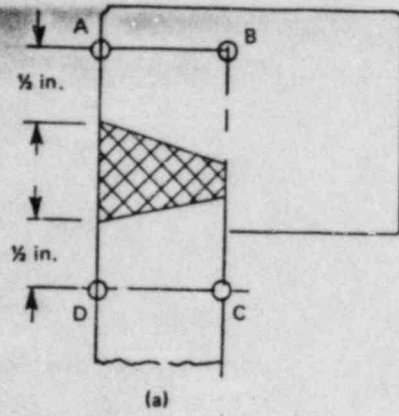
VALVE BODY WELDS
